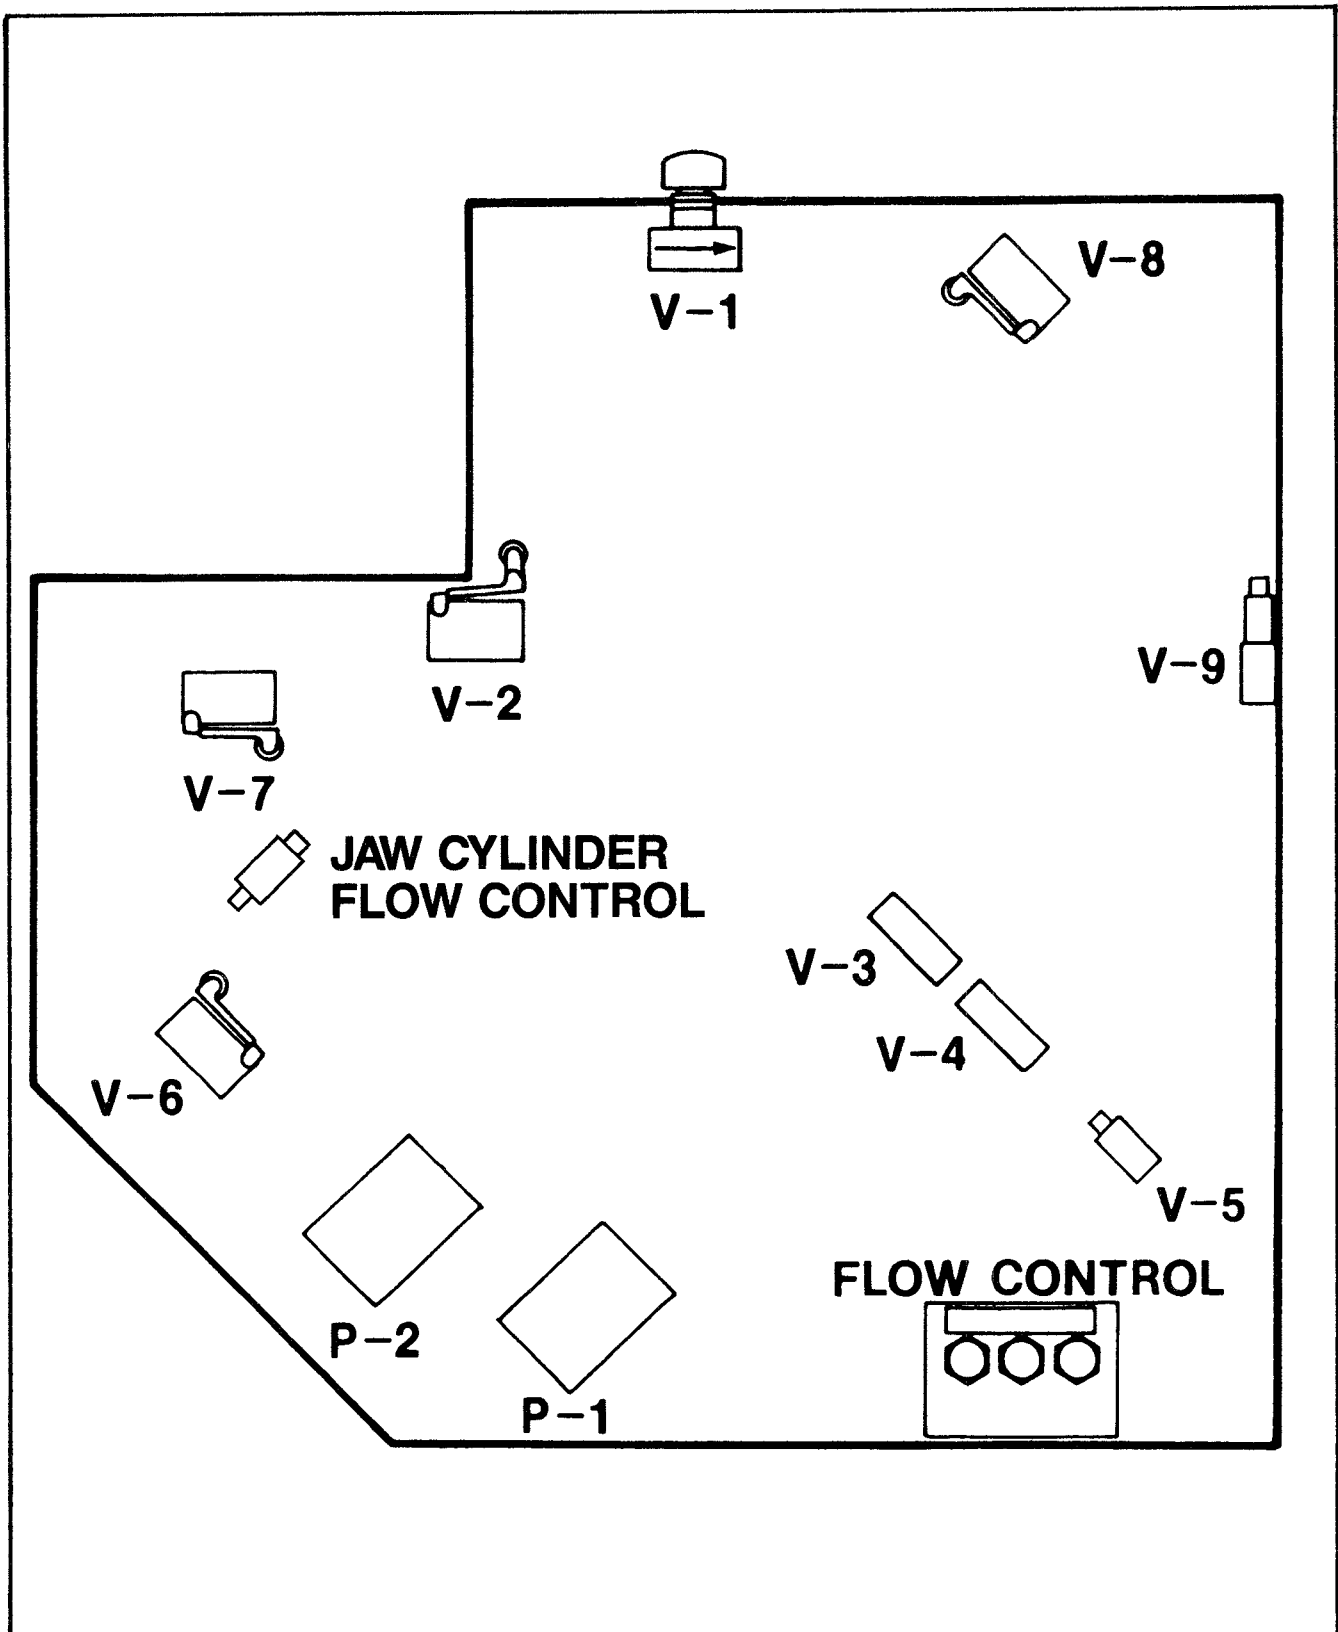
Trouble Shooting Valve Locations - S-847 Right Side View
